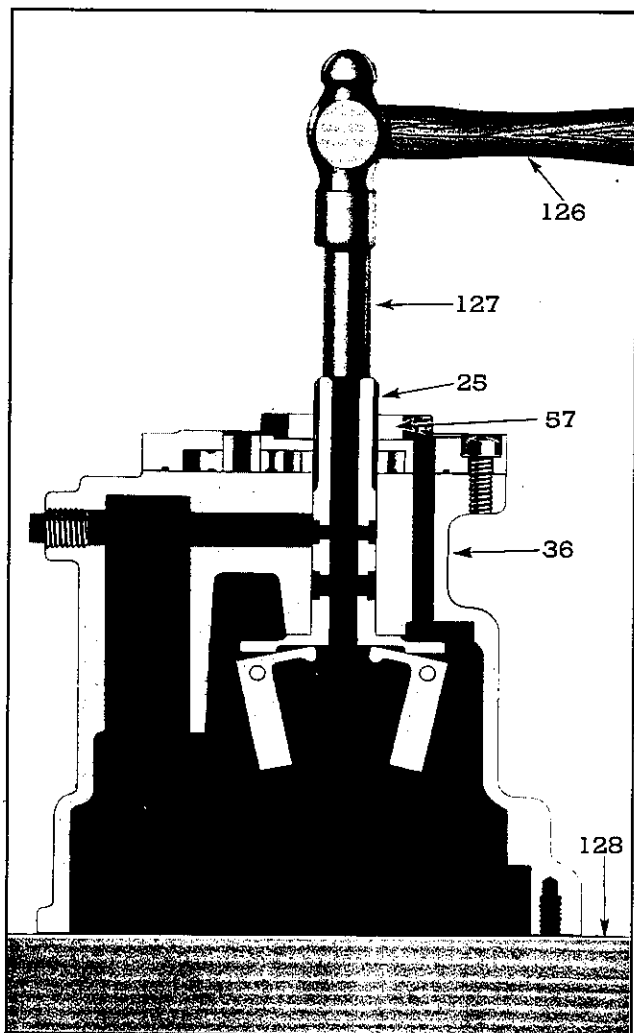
Separating Ballhead Drive Shaft from Drive Shaft Collar.
